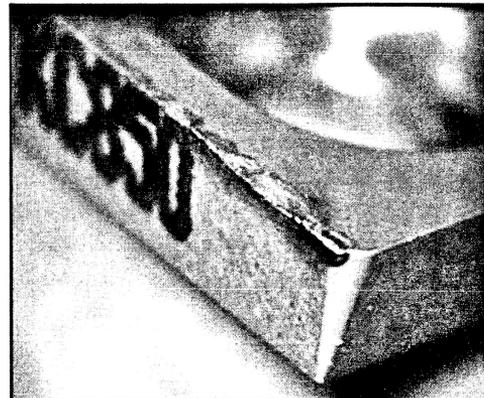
Higher tool life obtained for K313 when machining Vanadis 10 at feed rate 0.05 mm/rev and cutting speed 80 m/min
